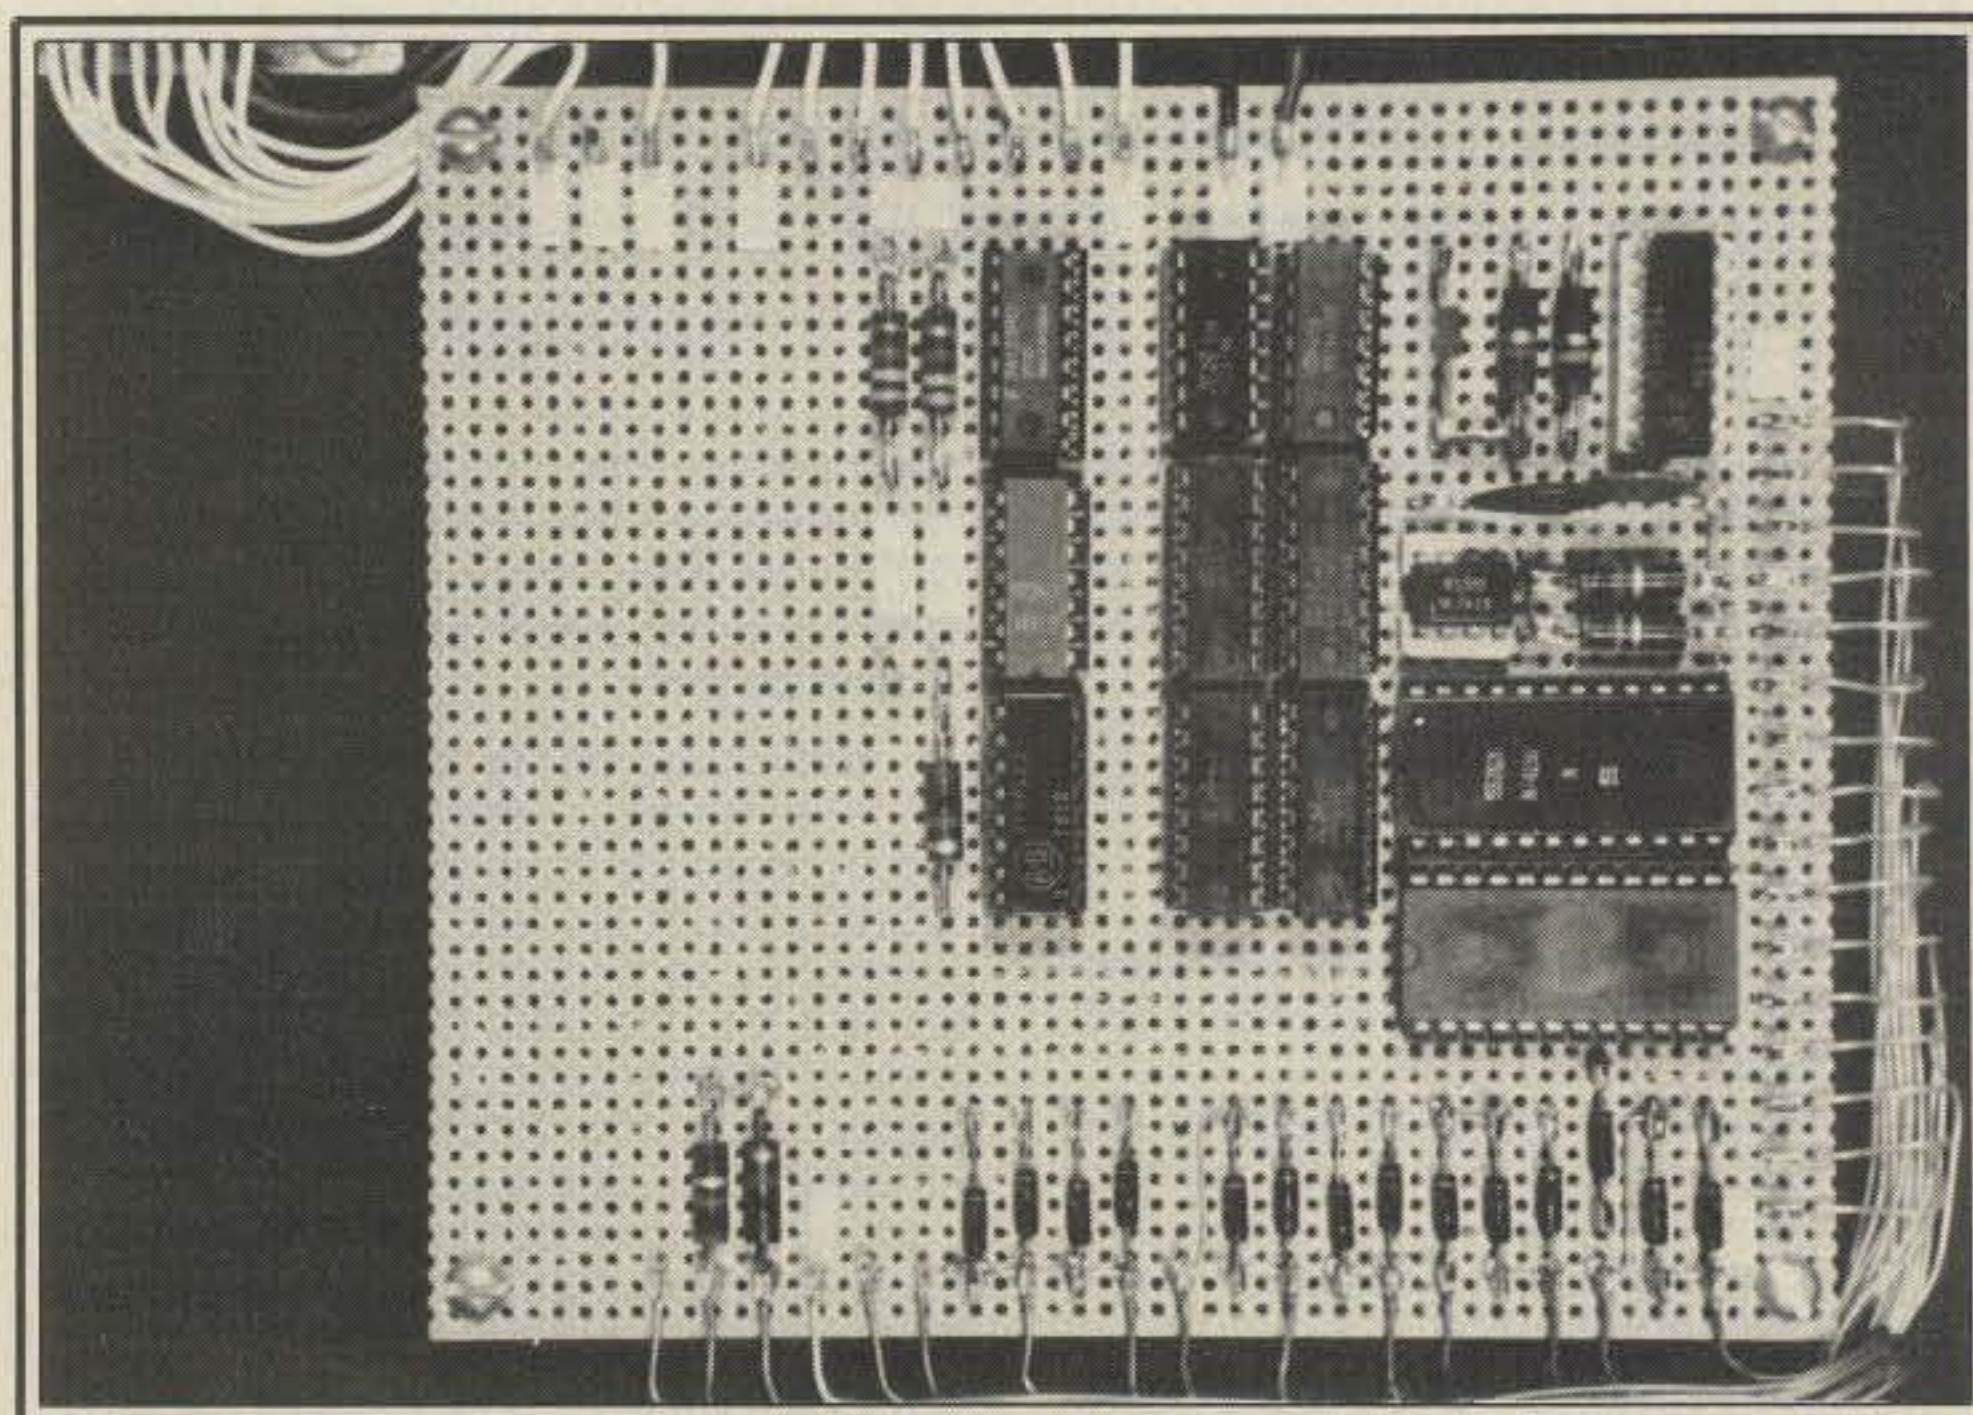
A top view of the keyboard controller circuit shows the layout used for the components. The circuit is built on a 4.75 by 5.25 inch piece of Vector™ phenolic P pattern board with 0.042-inch holes on 0.1-inch centers. This hole pattern nicely accommodates wirewrap sockets and terminals for the discrete components. Terminals are provided on the edge of the board to facilitate connection to the keyswitch assembly and computer.
